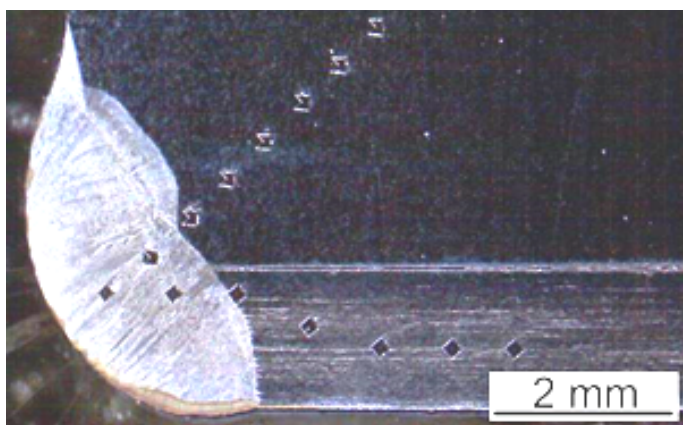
Hardness measurement area in the cross-section of the welded joint
